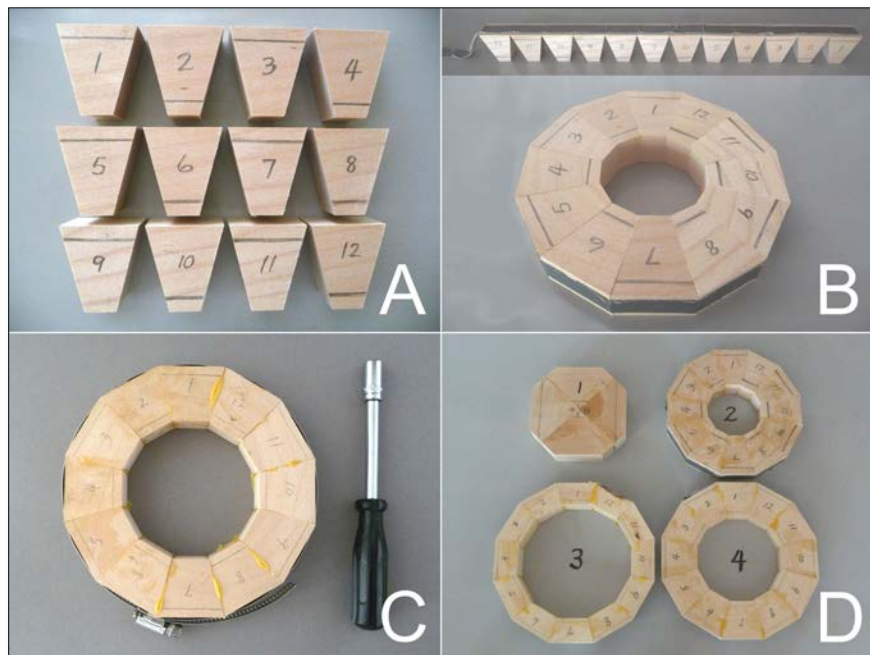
Gluing segments into rings. A: Twelve segments ready for assembly; B: Segments are wrapped around with a strip of duct tape to check for fit; C: A clamp is used to hold the ring together after glue is applied; D: All layers are glued together.
